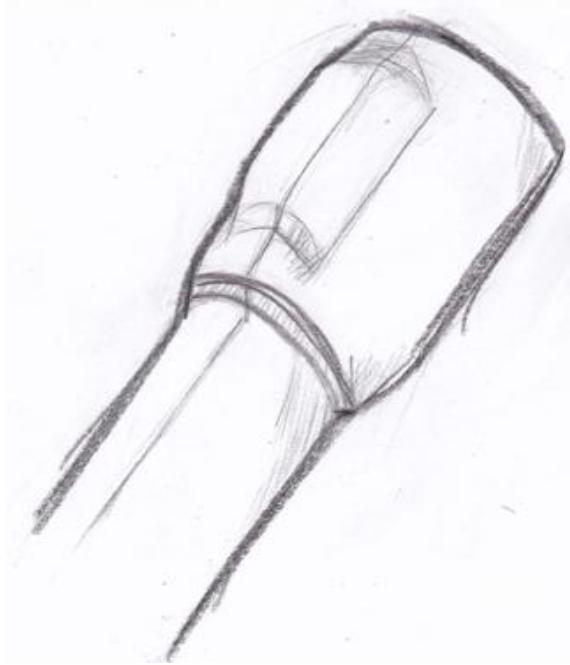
Sketch of casting of motor 4, connected with the carbon fiber tube.
